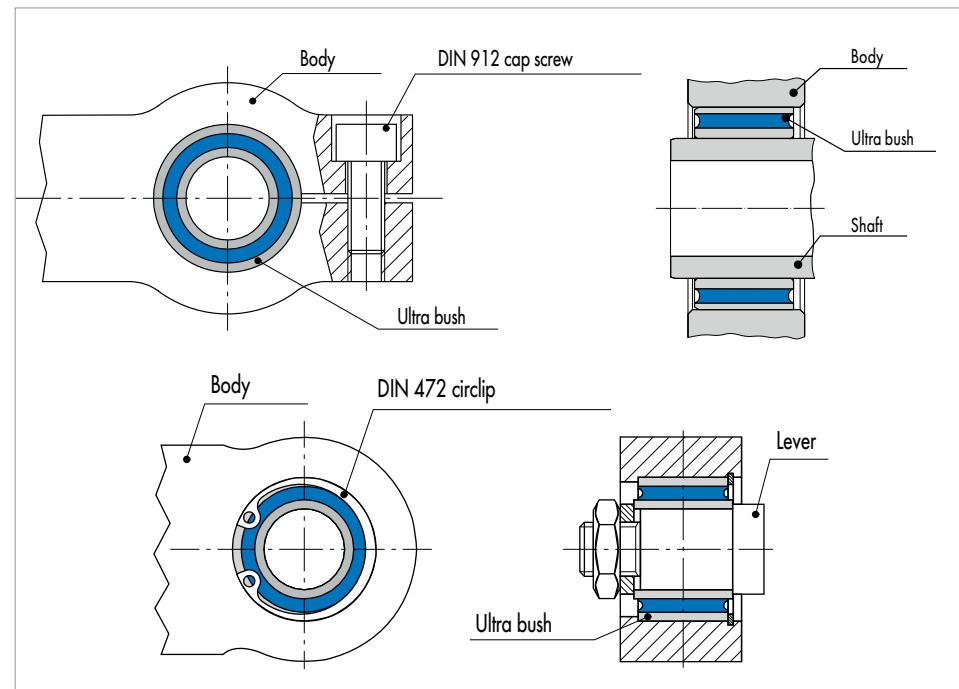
Fitting &amp; installation instructions: Ultra Bushes
